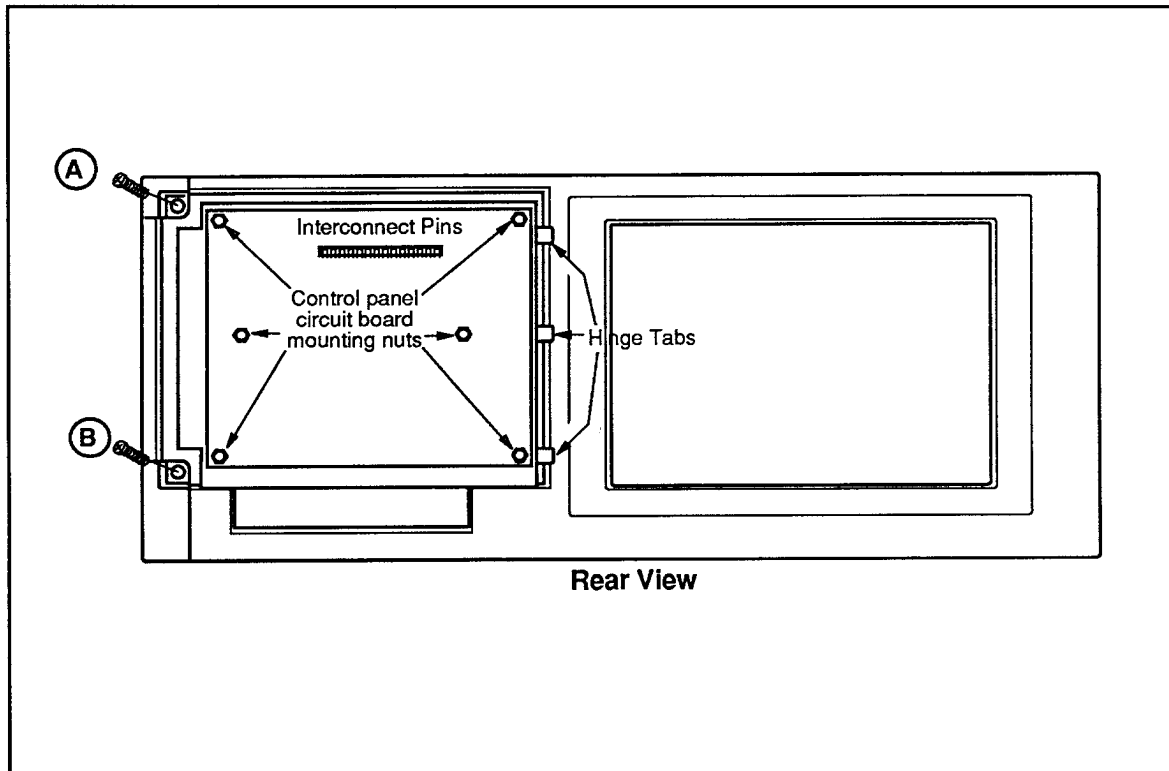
Removing Keypad circuit board from Front Panel Assembly.
